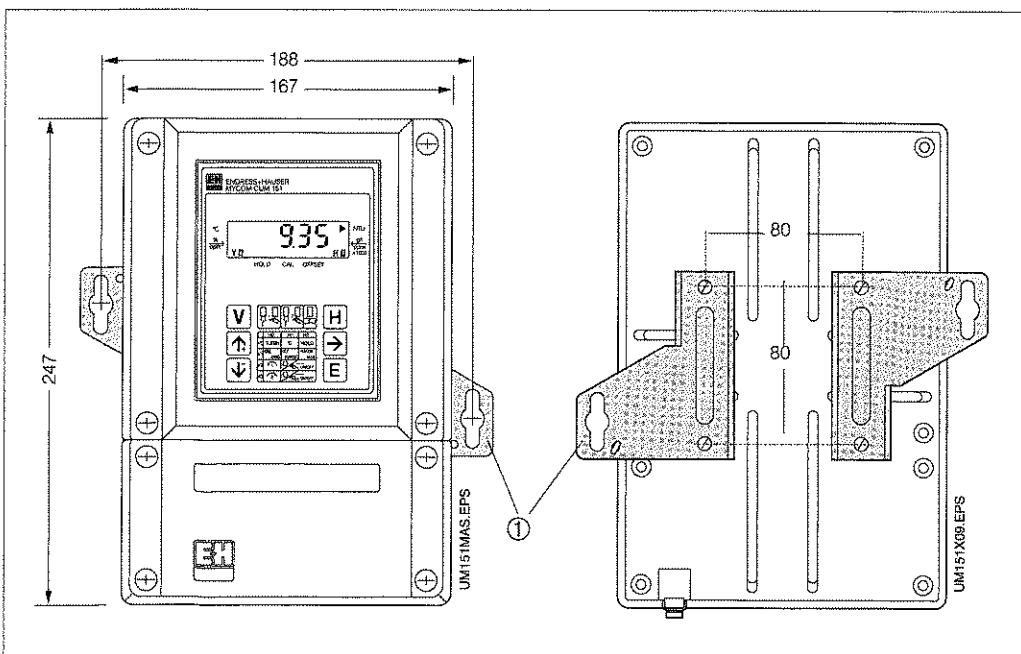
Dimensions of Mycom CUM 151 (left)
